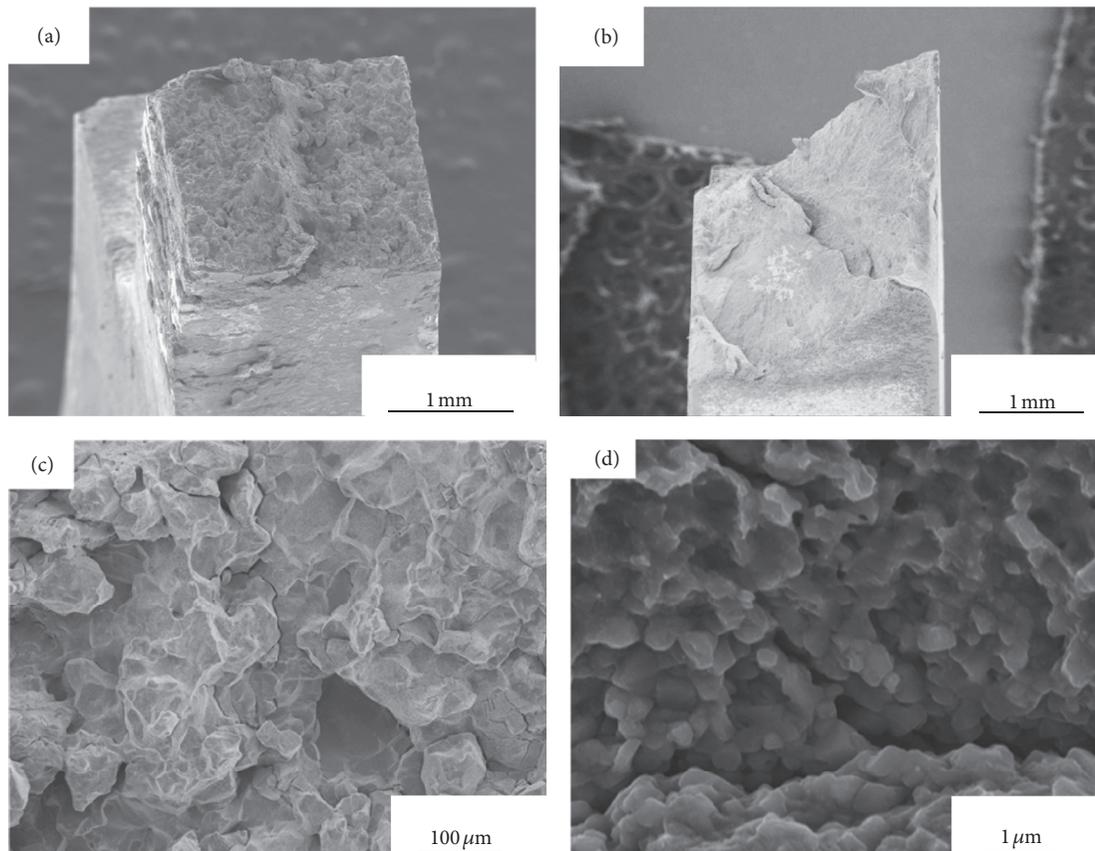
Fracture surfaces after SCC tests of (a), (c) sample 1, and (b), (d) sample 9 in (a), (b) macroscopic appearance, and (c), (d) microscopic observation.
